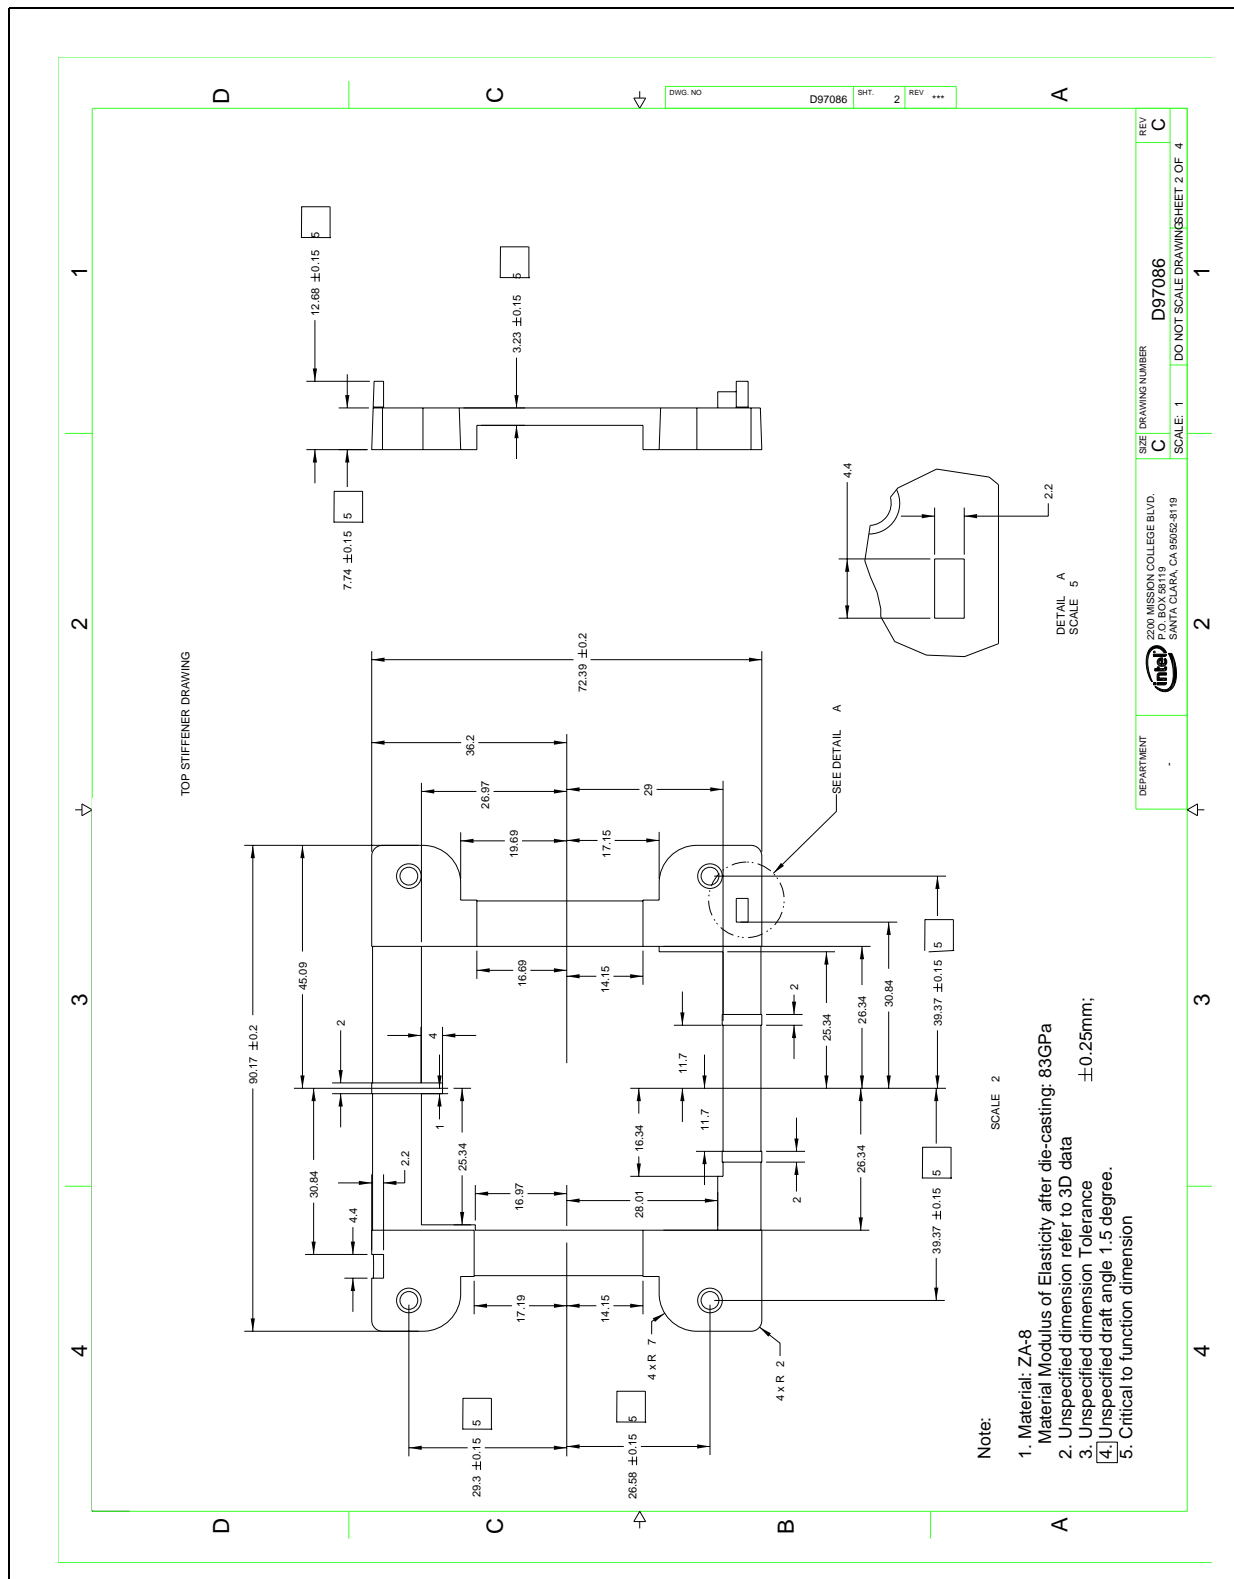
Intel 7300 Chipset MCH Heatsink Stiffener Drawing (3 of 4)
